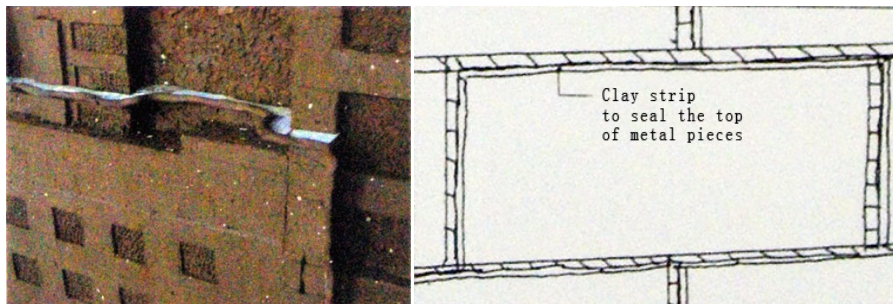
Parting lines, metal pieces and clay strip on top of metal pieces (B. Lin, X. Chen, 2007)
